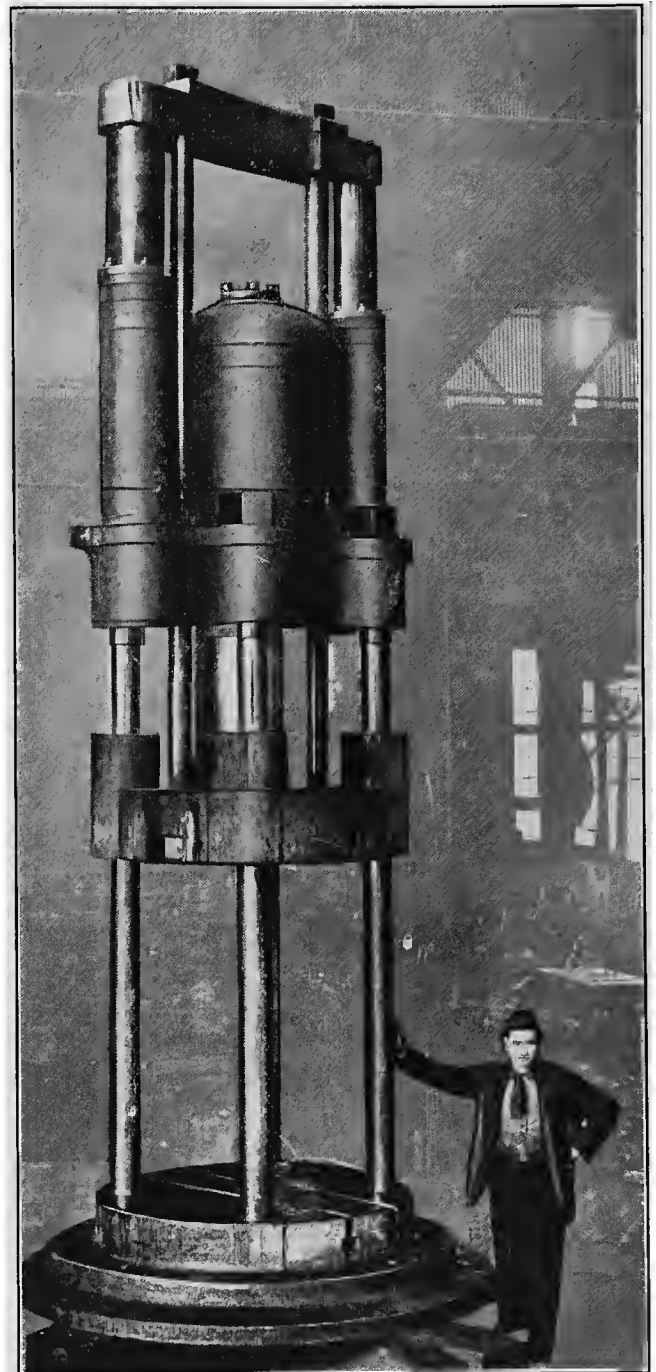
HYDRAULIC SHELL-FORGING PRESS BUILT FOR NOVA SCOTIA STEEL CO.
